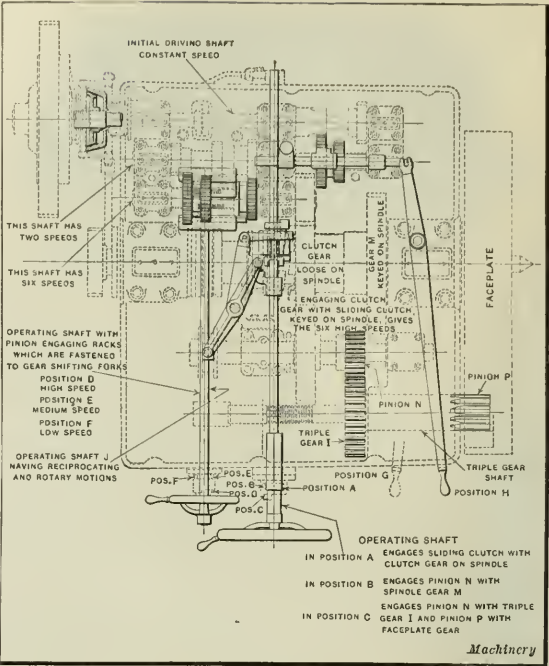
Arrangement of Gearing in Head of Putnam 42-inch Lathe
